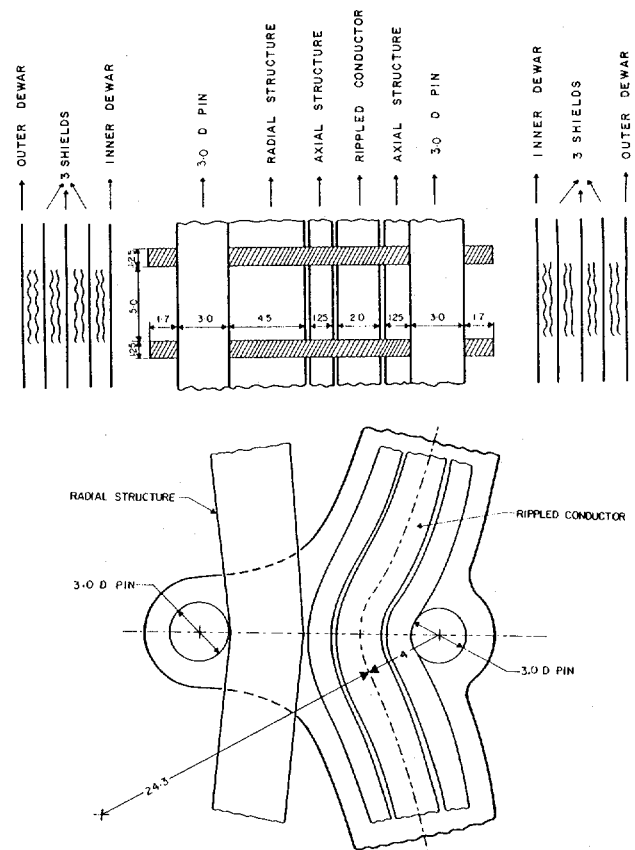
Vertical and top cross-section of winding and structure. All dimensions are in centimeters
